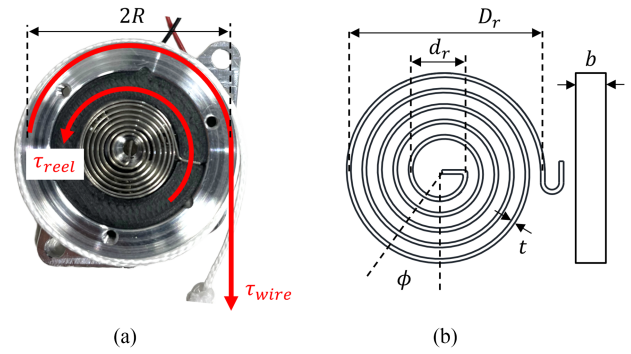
(a) Internal configuration of the spool with the reel spring. (b) Geometric parameters of reel spring (top and side views).
